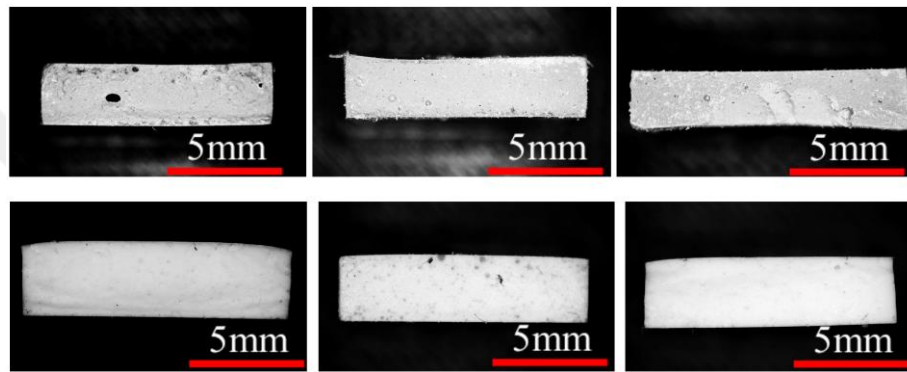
Fracture surfaces of selected samples from Epotek T7109-19 (top row) and Epotek T7110.
